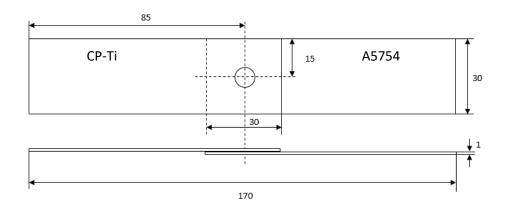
Dimensions of tensile-shear specimen welded by RSW (mm).
